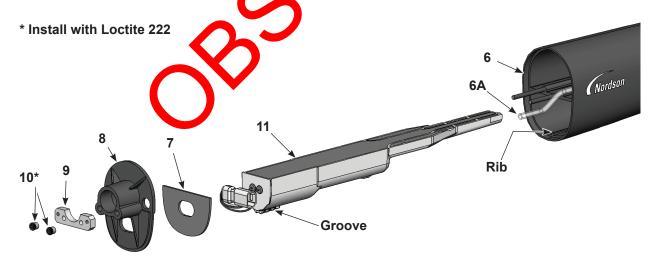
Bar-Mount Spray Gun Disassembly 2 of 3
